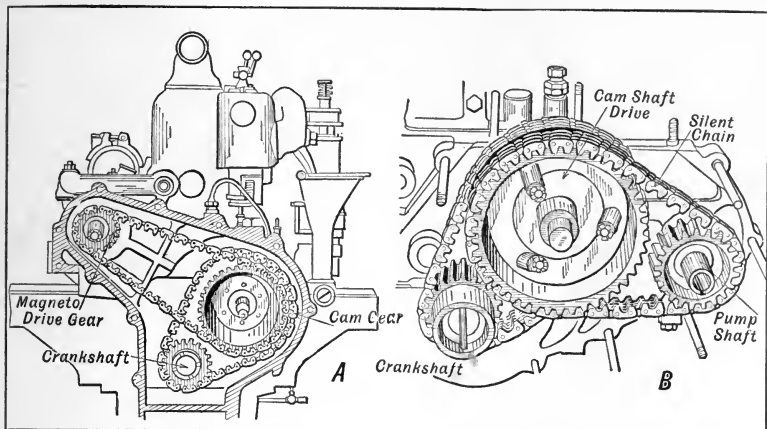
Showing Use of Silent Chain Connection Between Crank Shaft and Cam Shaft, and also for Driving Water Pump and Magneto Shafts. A—Chain Drive on Wolseley (English) 1912 Motor. B—Method of Using Silent Chains on White & Poppe (English) Power Plant.
